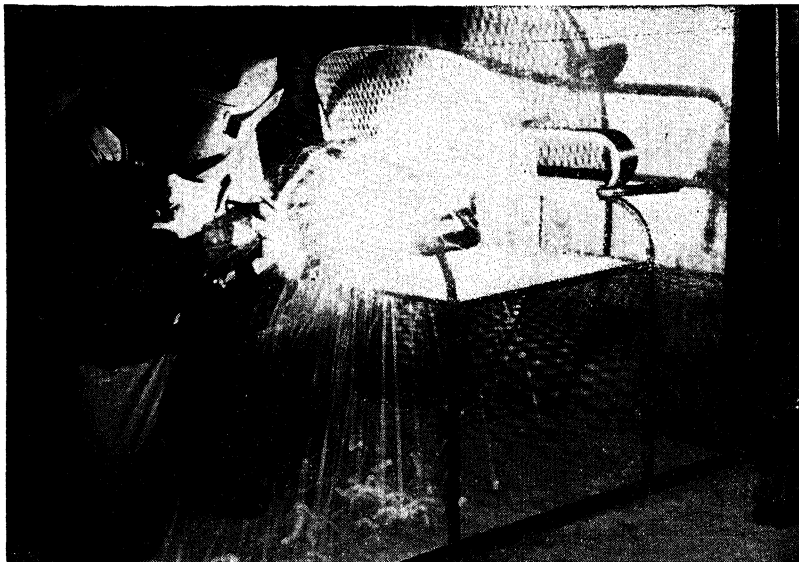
In the manufacture of all metal chairs and other pieces of furniture for outdoor service, this manufacturer saves as much as \$30.00 a day in one operation alone by changeover from riveted and bolted construction to welded fabrication.
